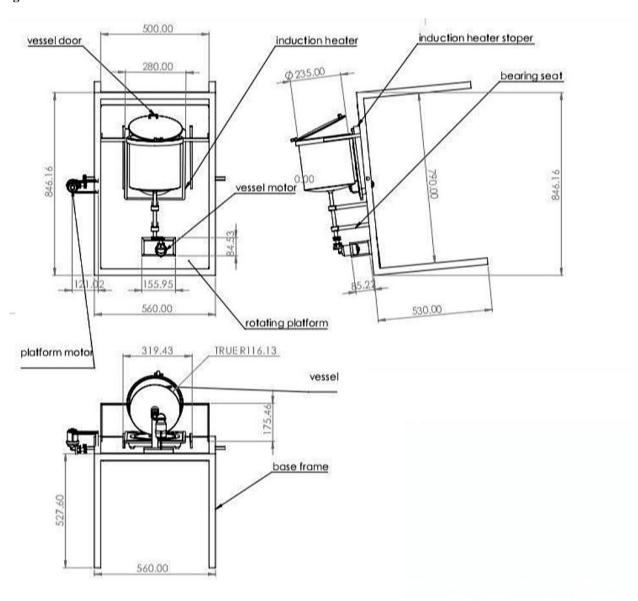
Cad Drawing of Electrical Cashew Nut Rosting Machine
